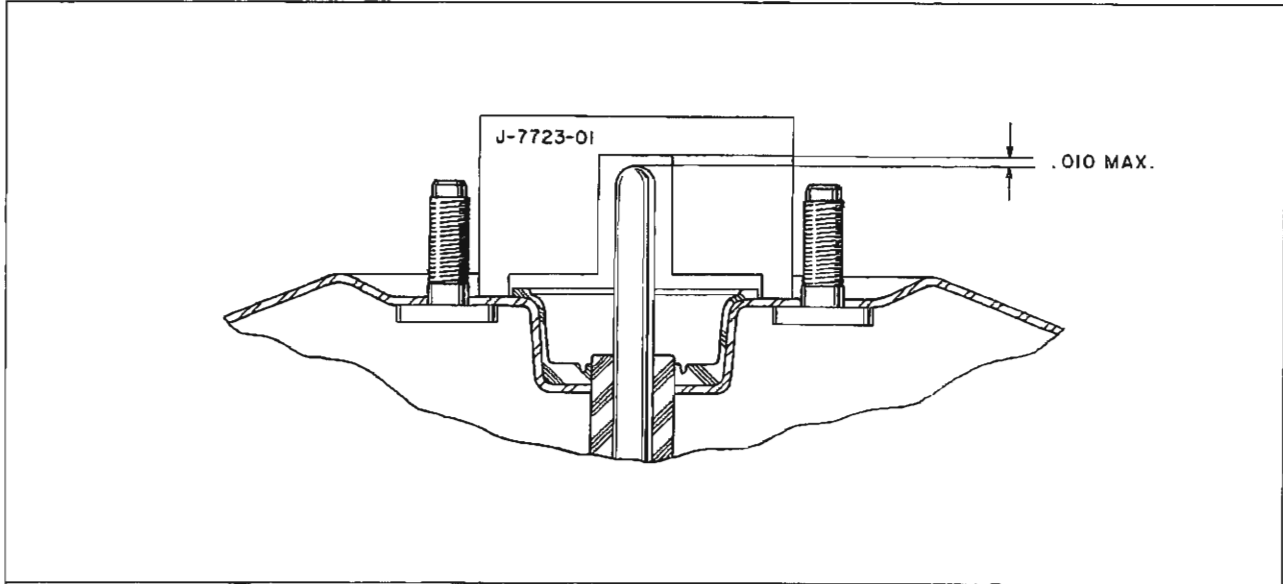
A-13 Checking Master Cylinder Push Rod Adjustment
